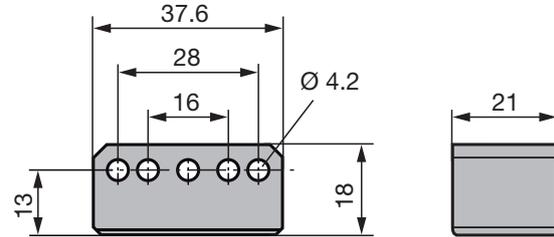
Installation dimensions of BTL6-A-3801-2 magnet
